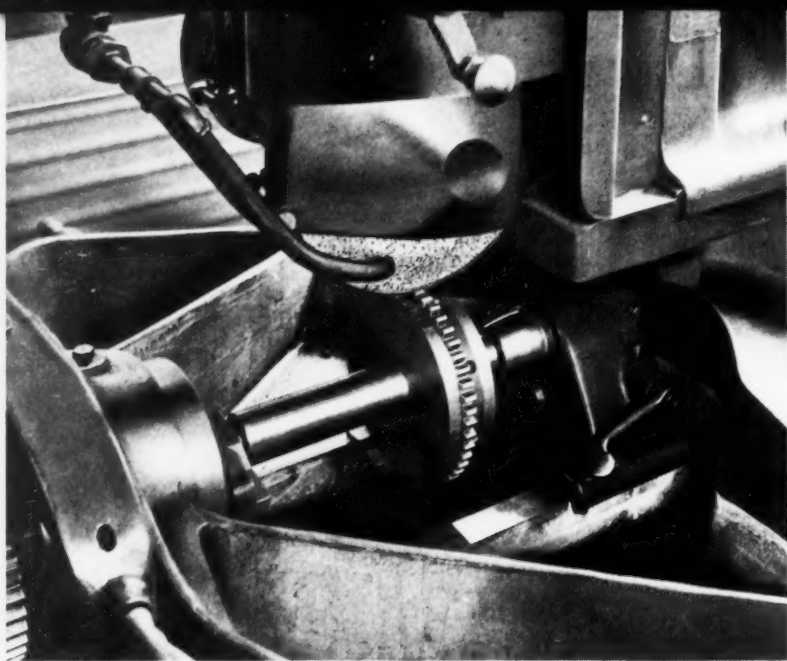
Tank Transmission and Speedometer Gears are Ground to a Tolerance of 0.0005 Inch with Respect to Tooth Form and Dimensions
